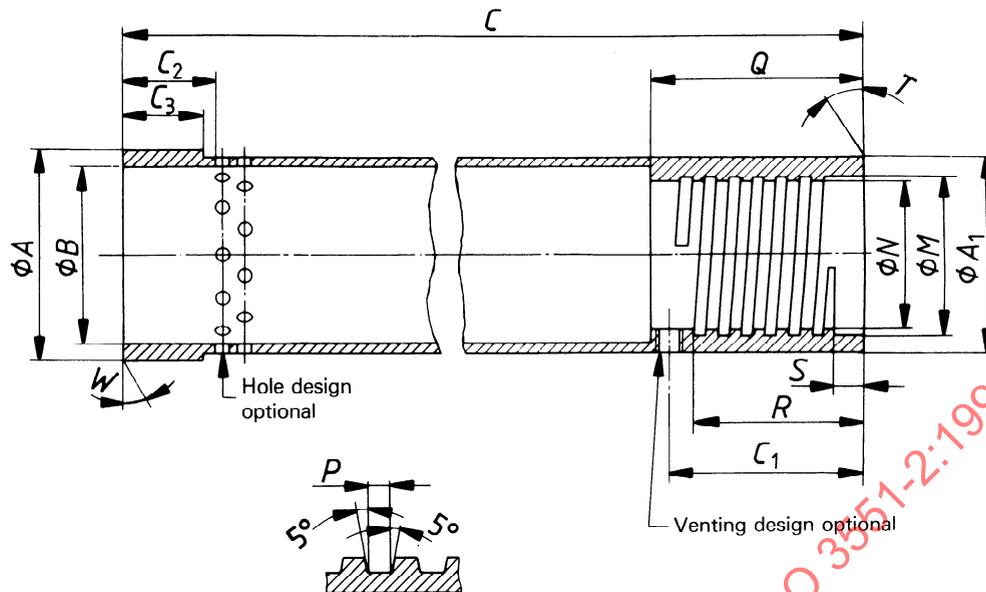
"WG" design double-tube core barrel — Inner tube (see table 34)
